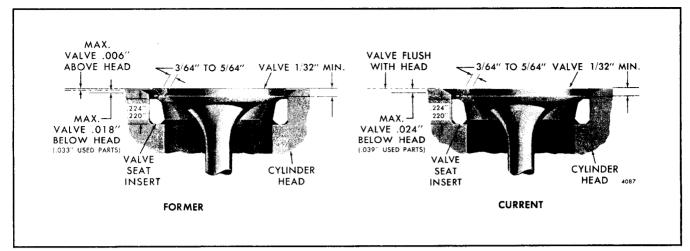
Relationship Between Exhaust Valve, Insert and Cylinder Head (Four-Valve Head)
